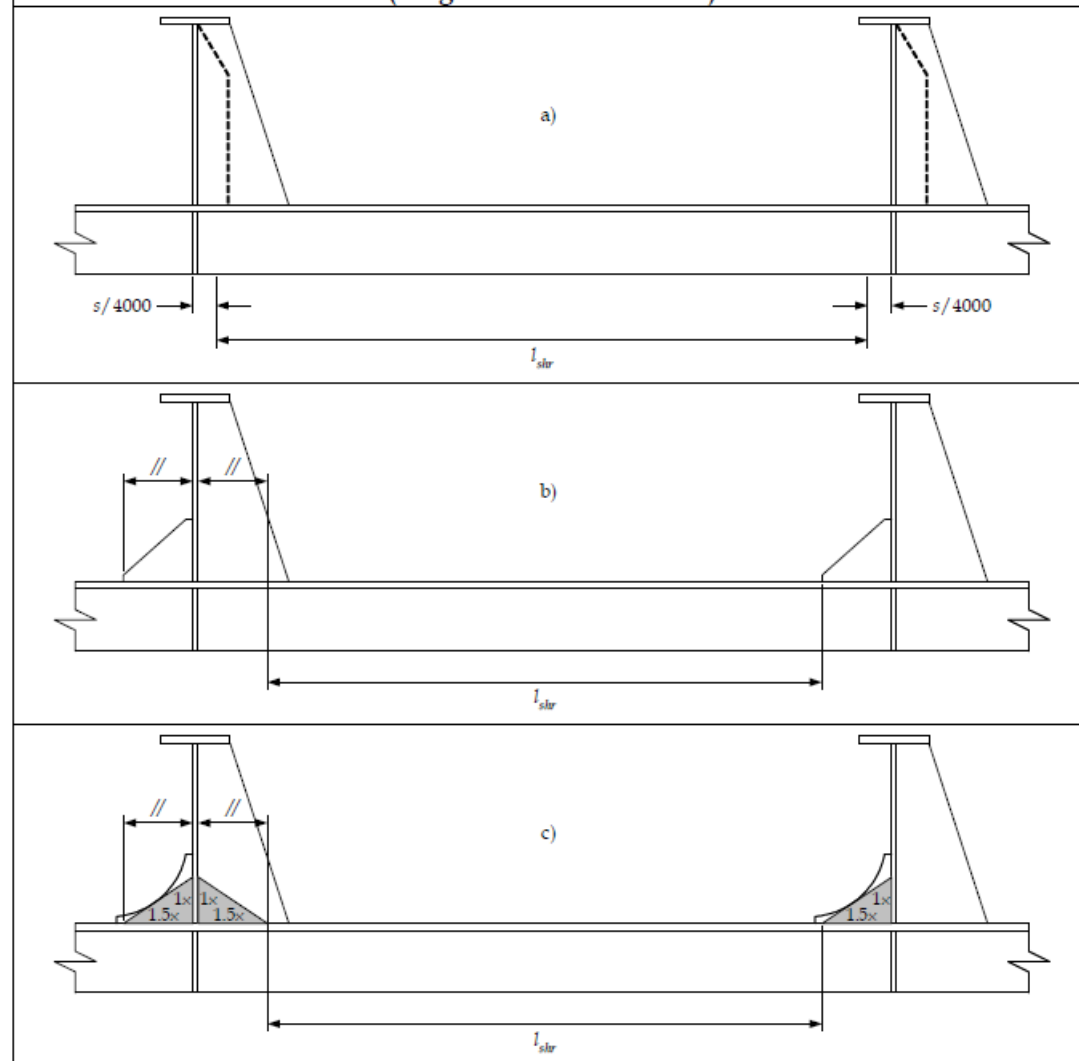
Effective Shear Span of Stiffeners Supported by Web Stiffeners
